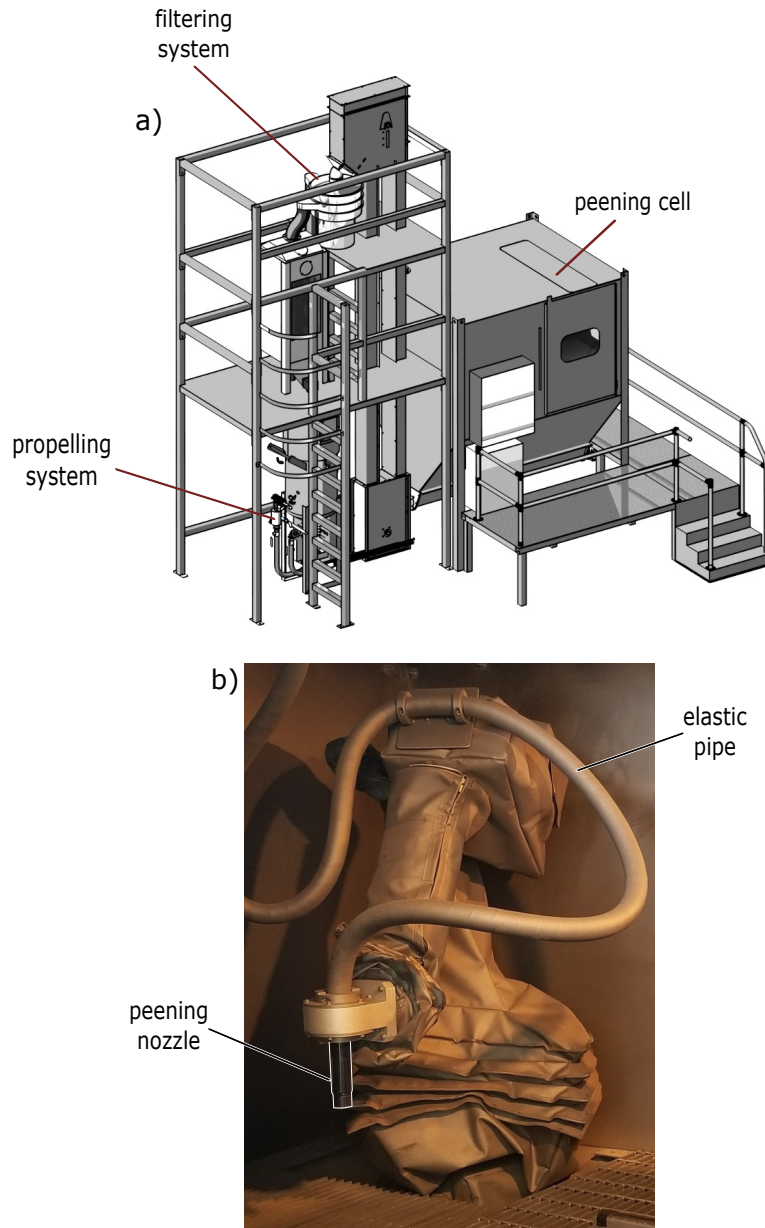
The automated shot peening equipment installed in the Aerospace Technology Center (CTA), Quebec, Canada. a) Schematic side of view of the peening machine. The treatment is executed inside a closed peening cell. The shot are propelled using compressed air, which is supplied externally. Used shot are continuously collected and passed to the filtering system that sorts out highly deformed shot using separator screens. The shot that pass through the screens are fed back to the propelling system. Adapted from Ref. [53] with permission from John Wiley & Sons - Books. b) The peening nozzle is attached to a robotic arm installed inside the peening cell. The nozzle is fed with shot by the propelling system through an elastic pipe. The robotic arm is covered with protective cloth preventing damage from reflected shot.
